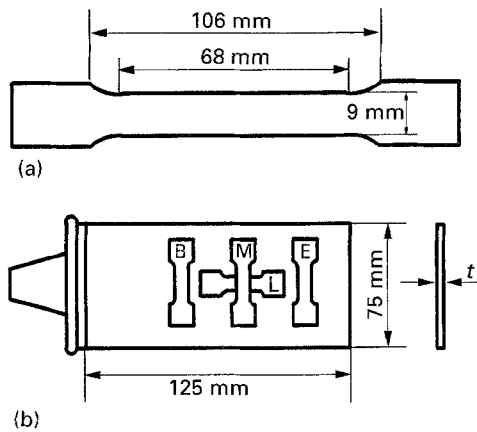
Mould cavities used in this work. (a) Type I, moulded tensile specimens. (b) Type II, rectangular plaque with location at which samples were machined.
